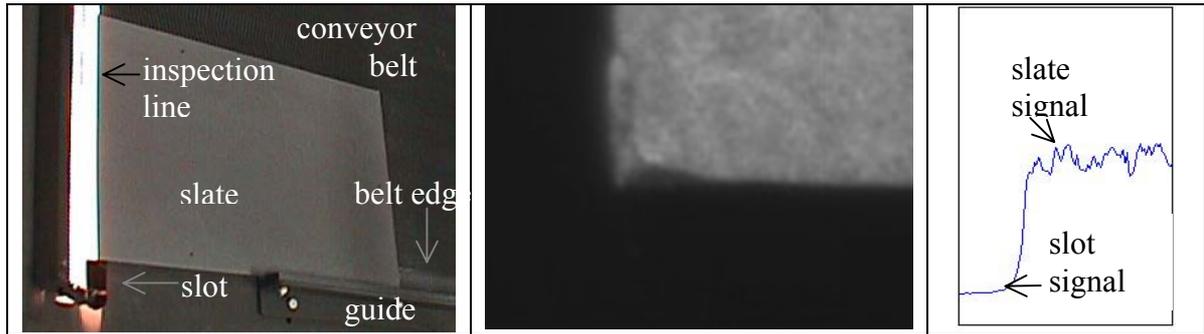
Conveyor belt detail, typical slate corner image and typical slate to belt transition signal.
